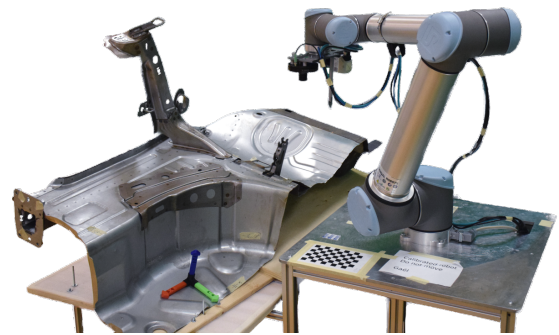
A laboratory prototype of the robotic workcell for spot weld inspection.
